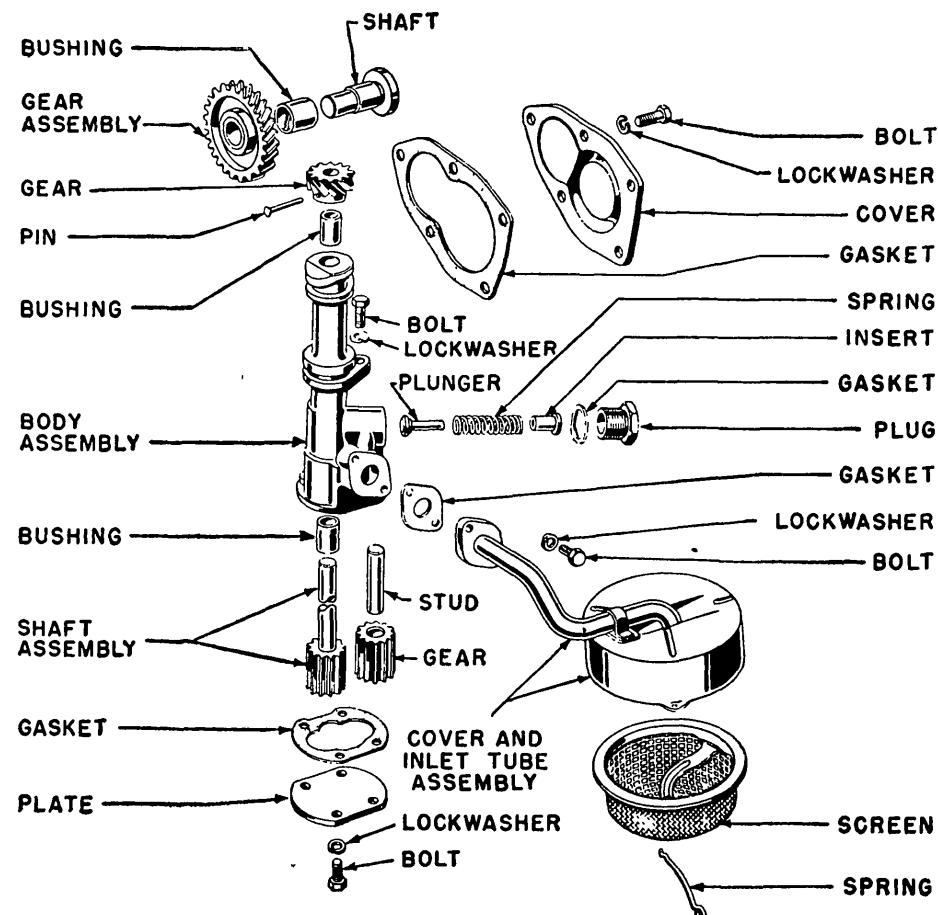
1949-52 Ford and Mercury V8 oil pump
